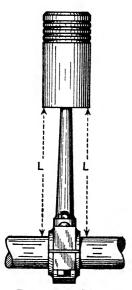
Measure distance L to check alignment of connecting-rod bearings. (Courtesy of Power.)
